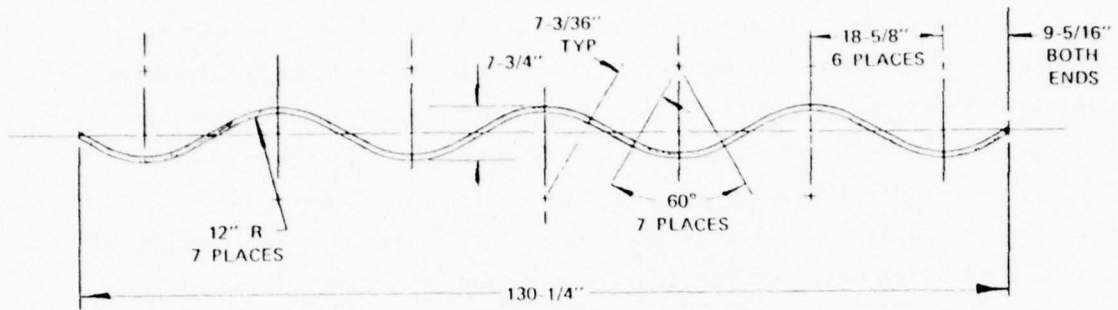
"Slack" conduit. Conduit o.d. is 0.875 inches with a wall thickness to inside radius ratio = 1.3. (PYU-3654)
